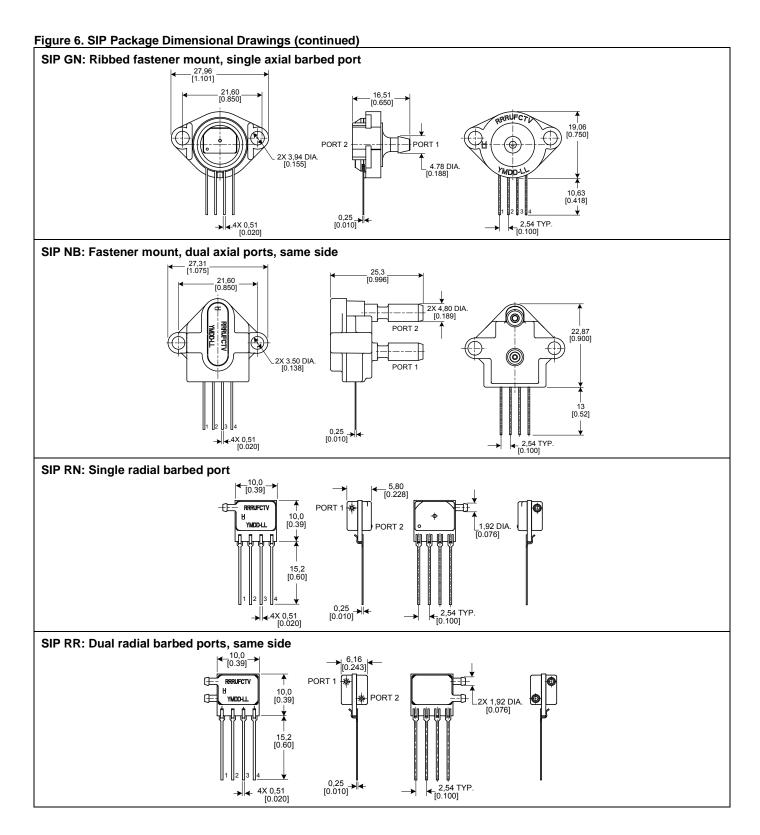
SIP Package Dimensional Drawings (For reference only: mm [in])
